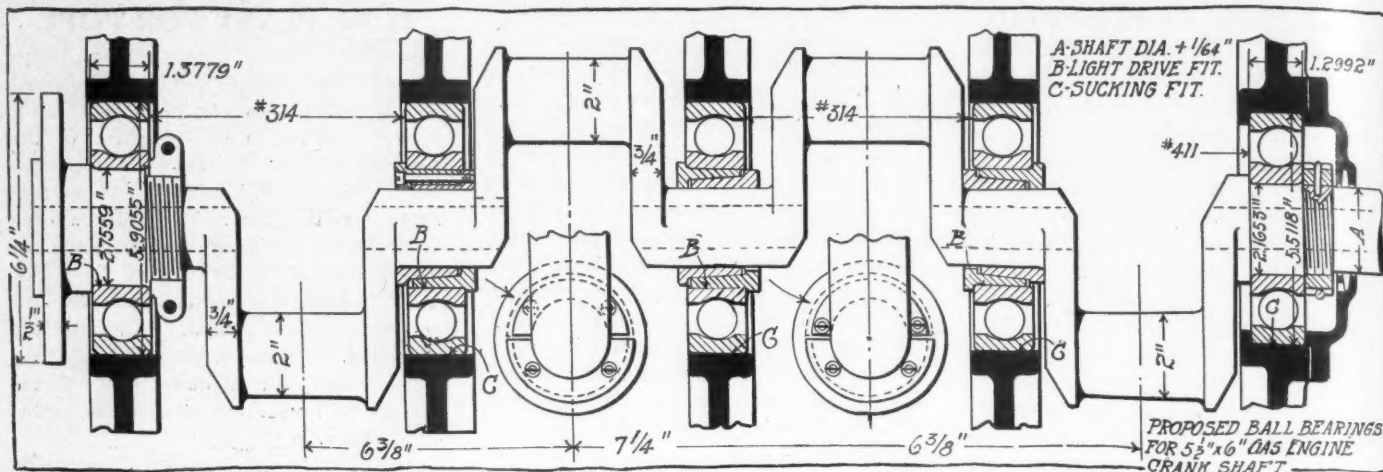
HESS-BRIGHT BALL-BEARING CRANKSHAFT, SHOWING RETAINERS UNDER CRAMPED CONDITIONS
